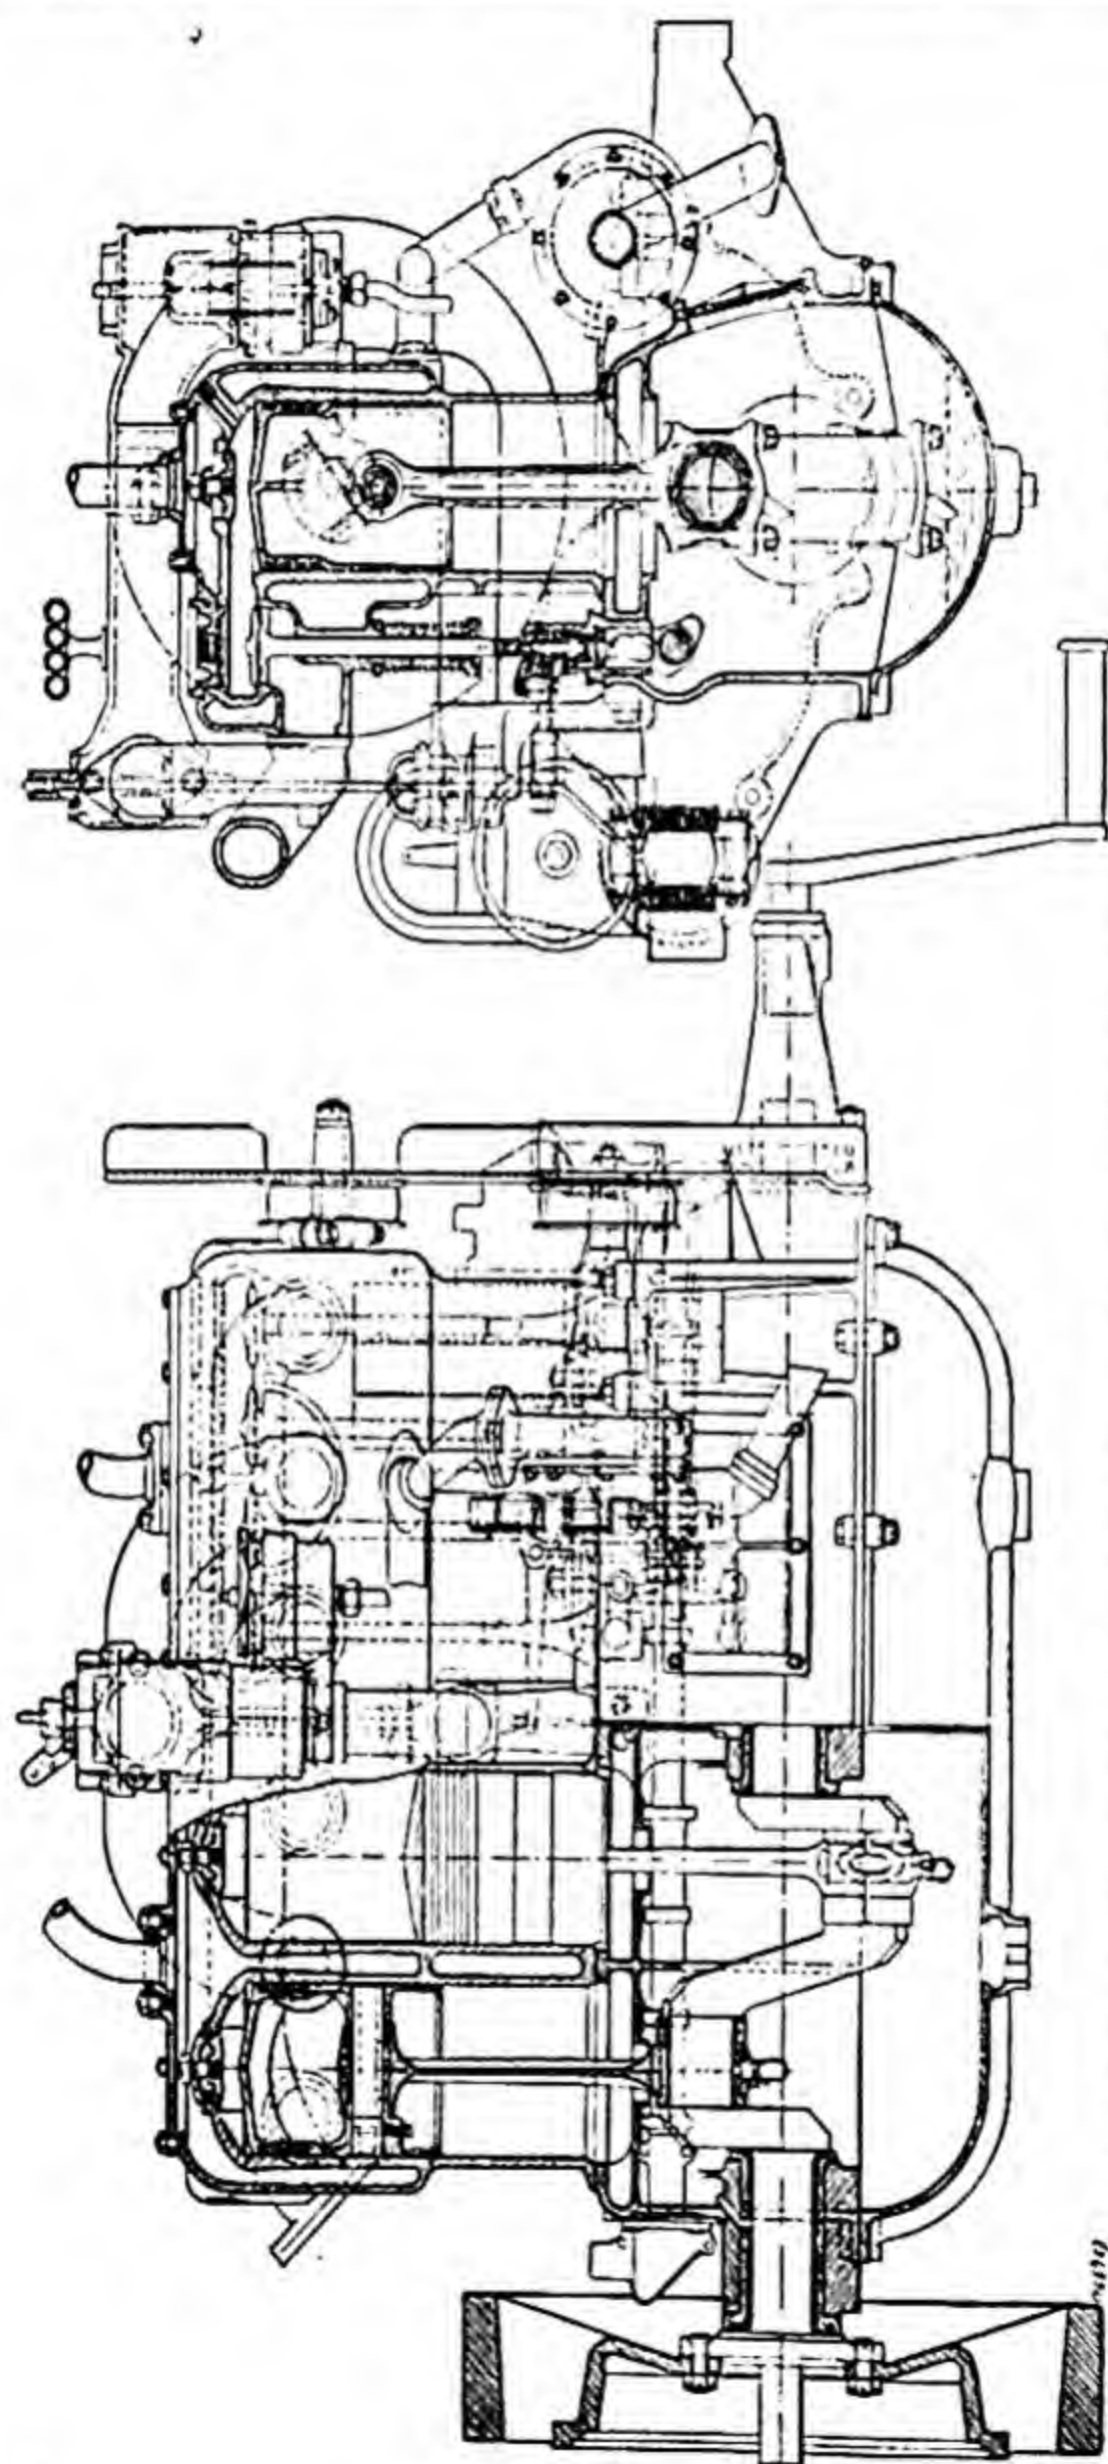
Sectional side and end elevations of four cylinder motor for a 30 h.p. Siddeley motor car.
